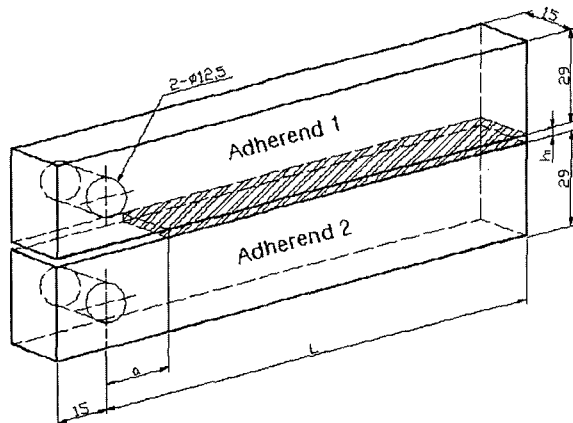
Shape and dimensions of an adhesively bonded DCB specimen.
